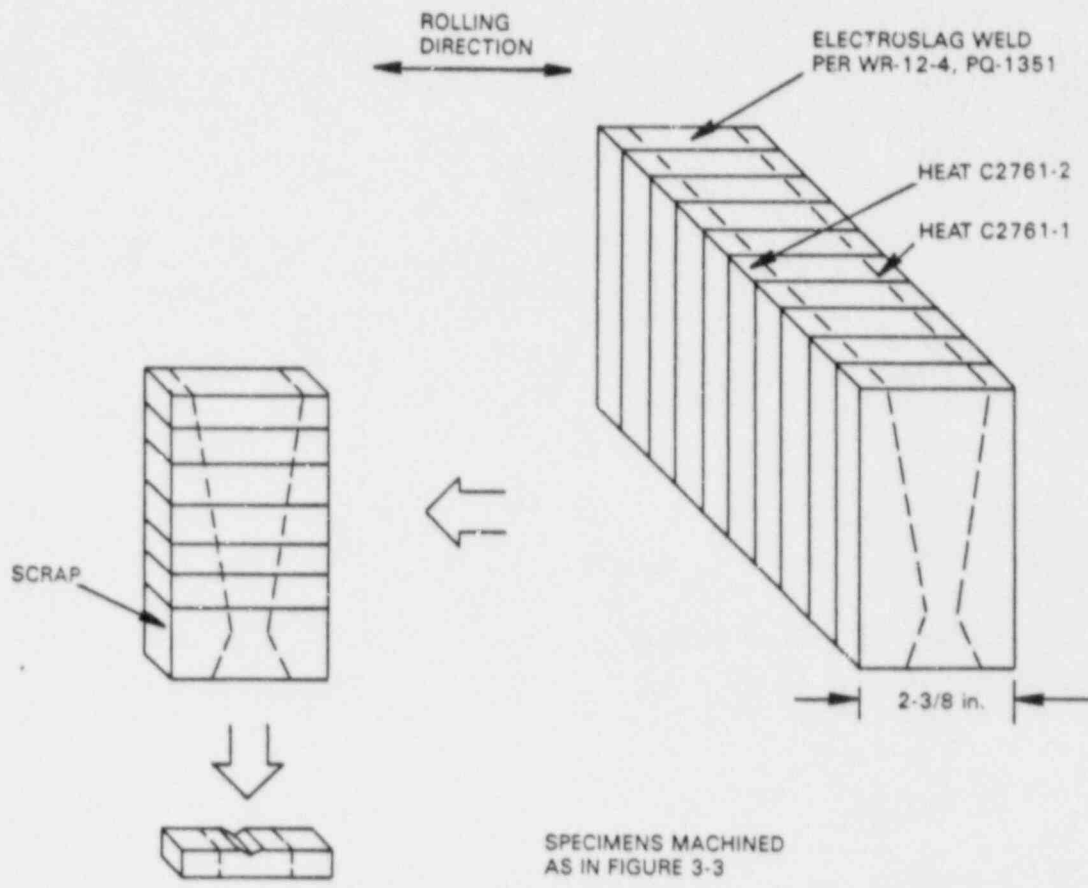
Fabrication Method for Weld Metal Charpy Specimens
